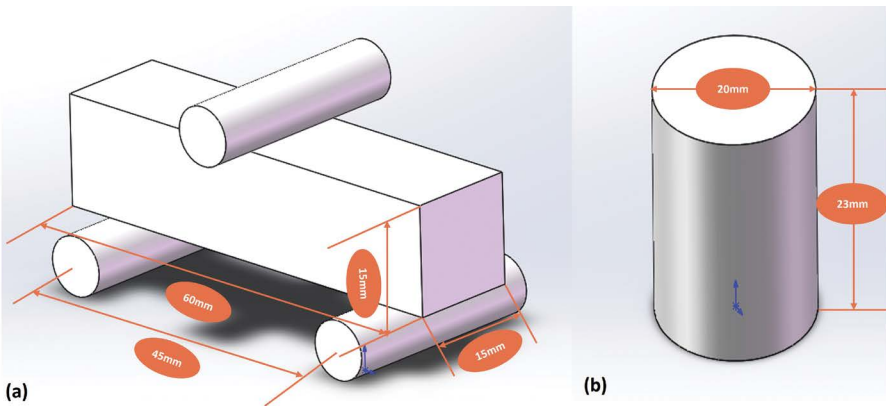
Specimen size for mechanical property test: (a) configuration of three-point bending, and (b) compressive strength test sample dimensions [23].
